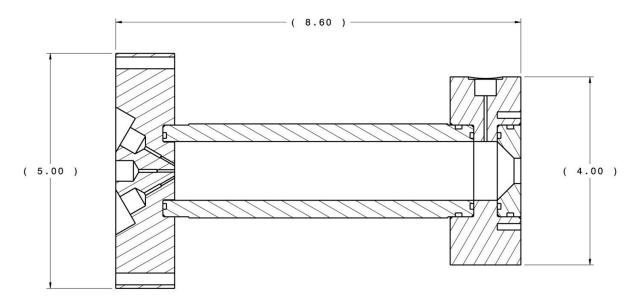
Bi-propellant single-element thruster. Cutaway side view including all elements of the thruster. All dimensions in inches.
